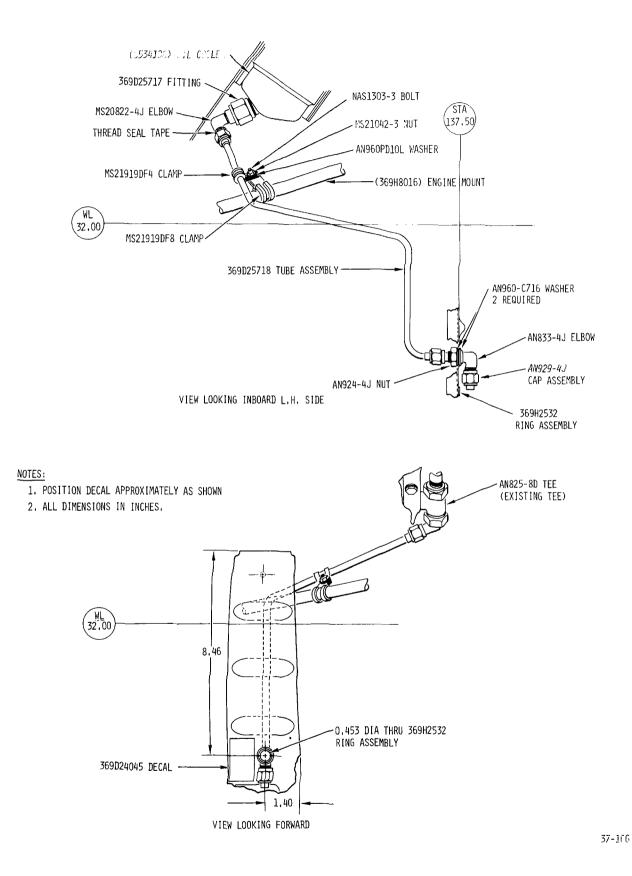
Engine oil tank and oil cooler drain kit installation
